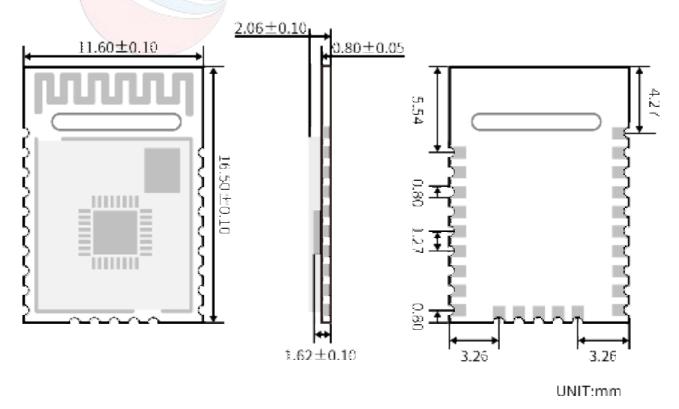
Recommended PCB Footprint of RF-BM-BG22A1 (mm)
